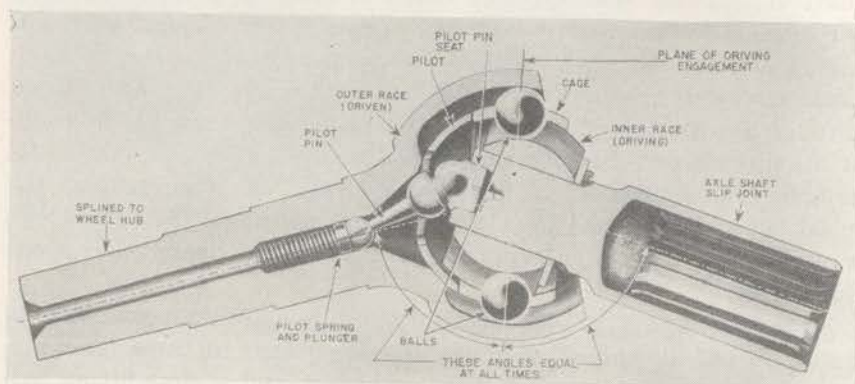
Rzeppa type of constant velocity universal joint assembled.
